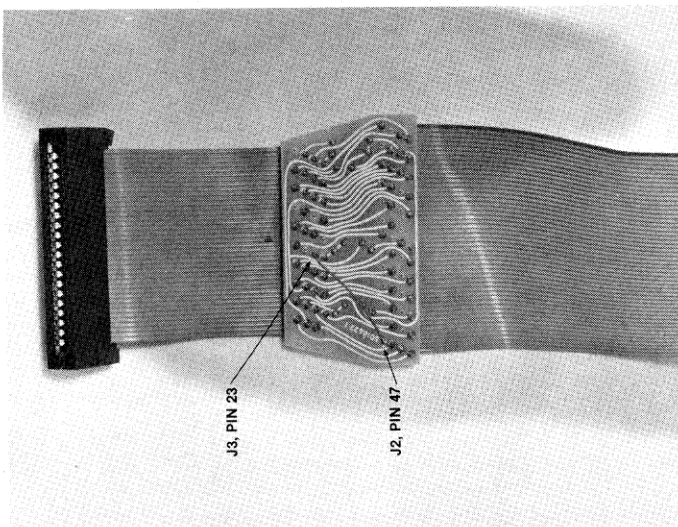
Printer Interface Cable PC Board. Install single jumper wire as shown.
